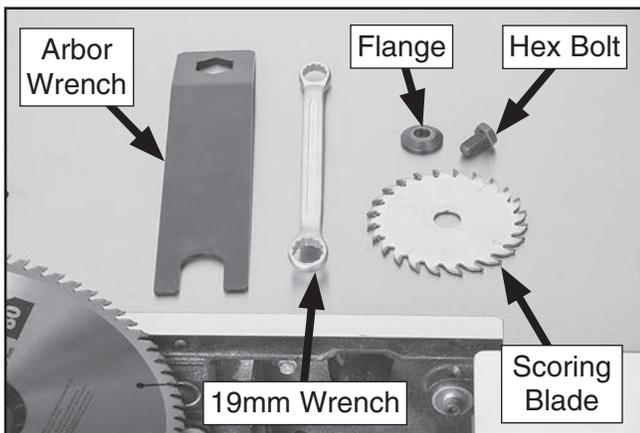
Scoring blade, flange, arbor hex bolt, 19mm wrench, and arbor wrench.
